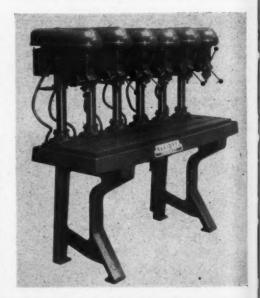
One of the new Elliott Progress multispindle drilling machines
